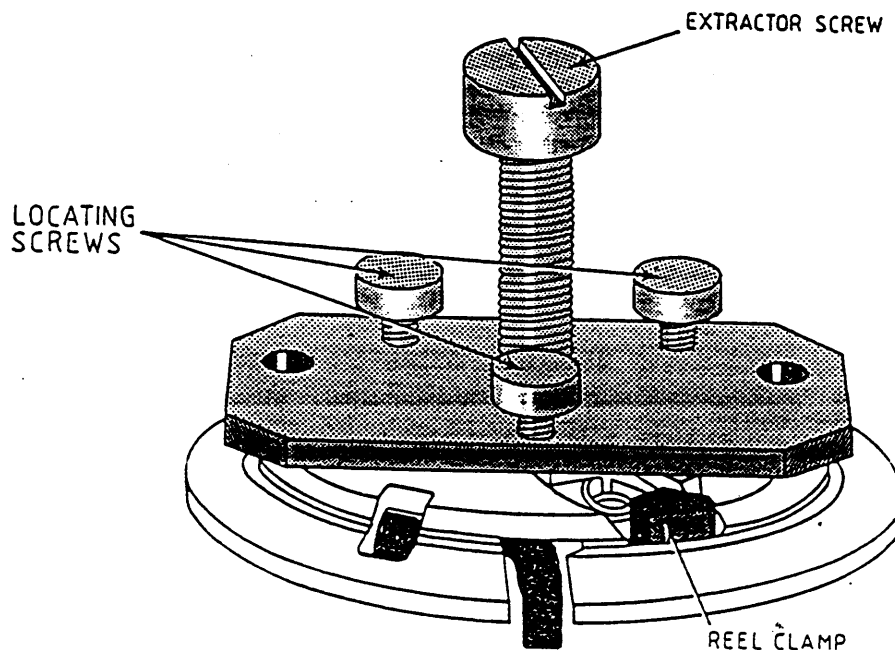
UNIVERSAL HUB REMOVAL TOOL (SET FOR SUPPLY HUB)
